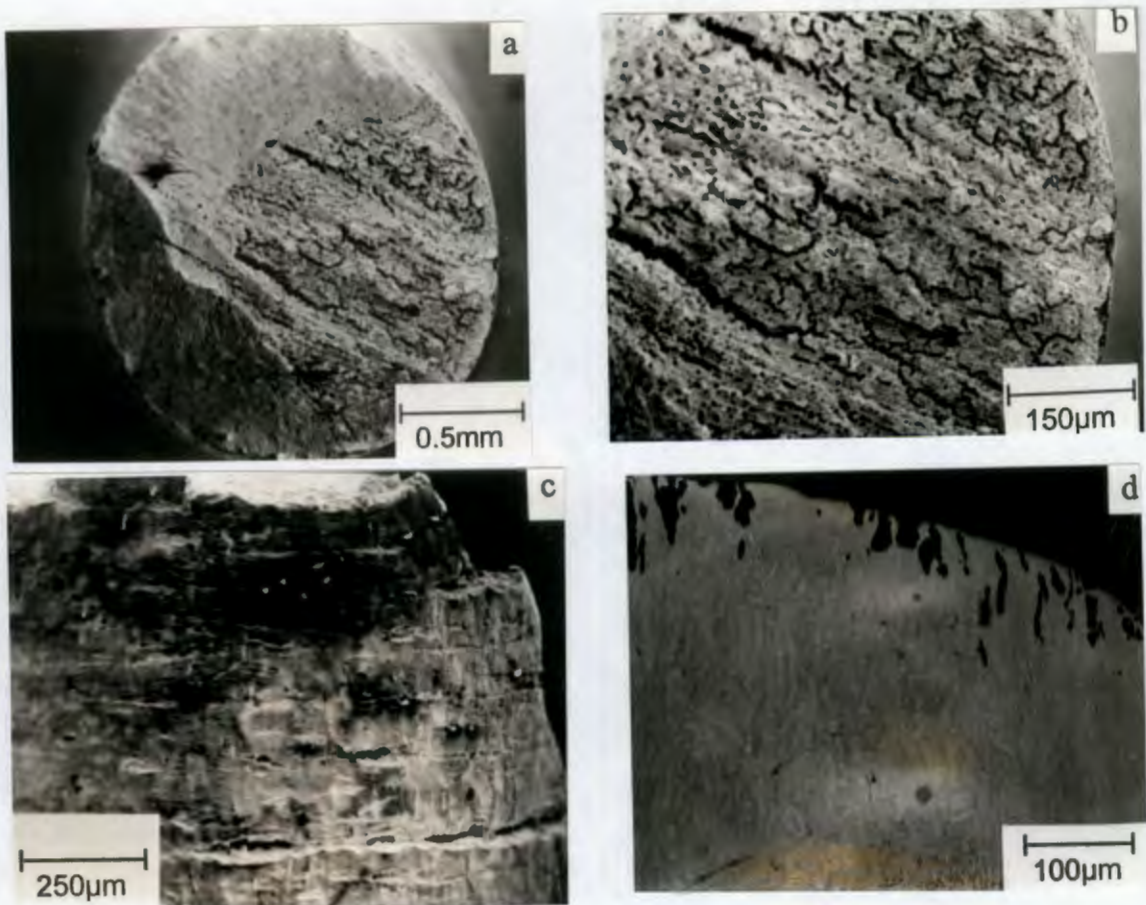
Cromanite™ specimens tested at open circuit potentials in a 3 M NaCl solution. (a) Multiple cracking on the fracture surface of the specimen™. (b) A higher magnification of stress corrosion cracks. (c) Secondary cracking along the gauge length. (d) Transverse section through this specimen.
